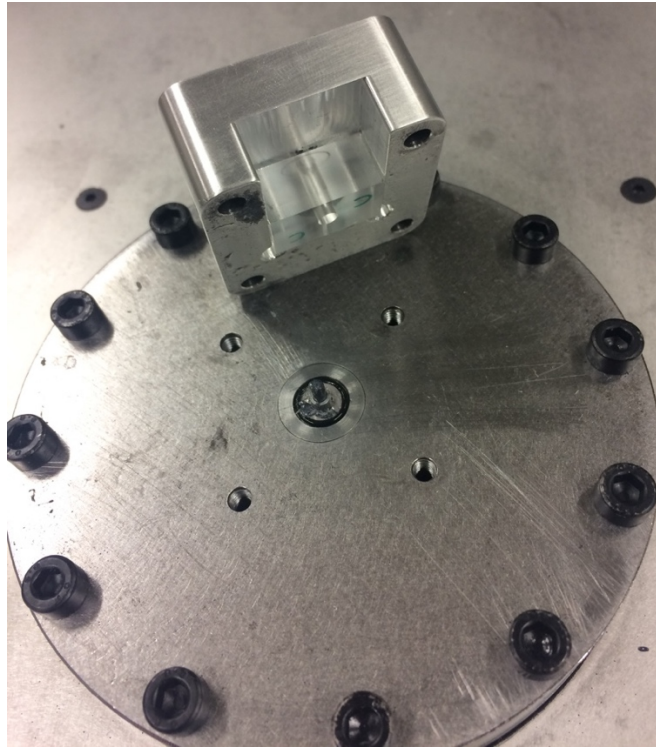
Clamp to fix the nozzle on hydro-grinding rig
